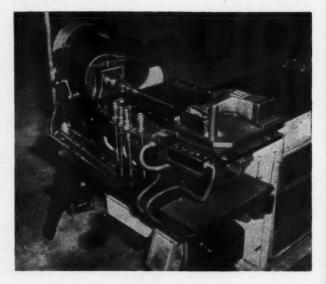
Shaft components for sewing machines are super-finished on this centreless machine, which was designed and built by the company. Fine-grit stones are oscillated horizontally by an electric vibrator
